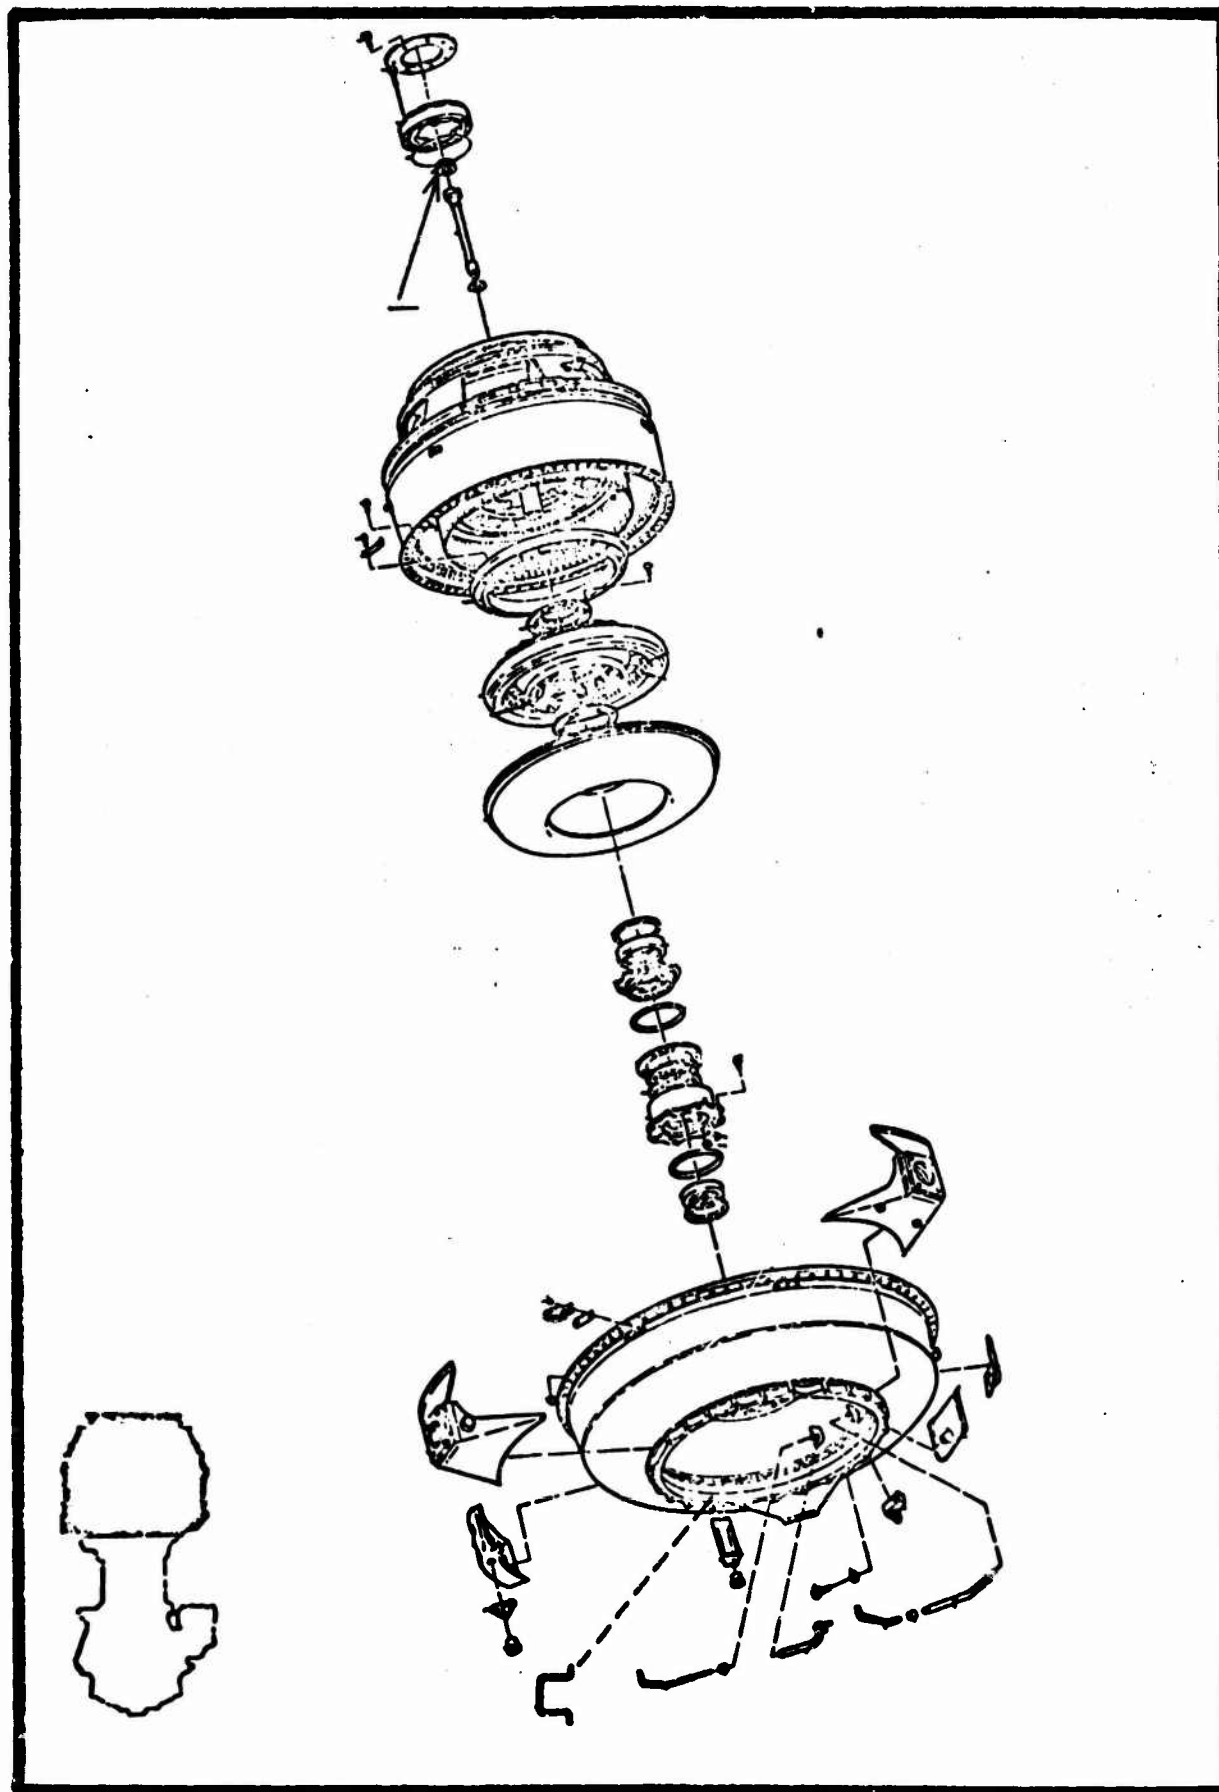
Diffuser Housing, Rear Bearing Cover, Combustion Turbine Assembly and Related Parts
